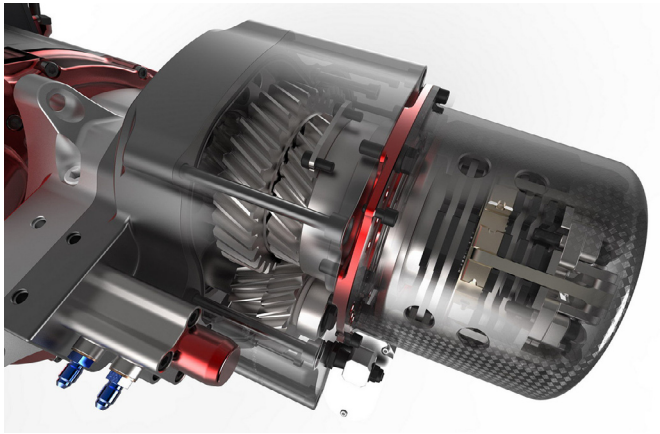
Rimac Automobili's (Concept_One) high-speed dual permanent-magnet electric motor (600 kW peak power, 12,000 RPM) featuring a double-clutch two-speed gearbox [148].
